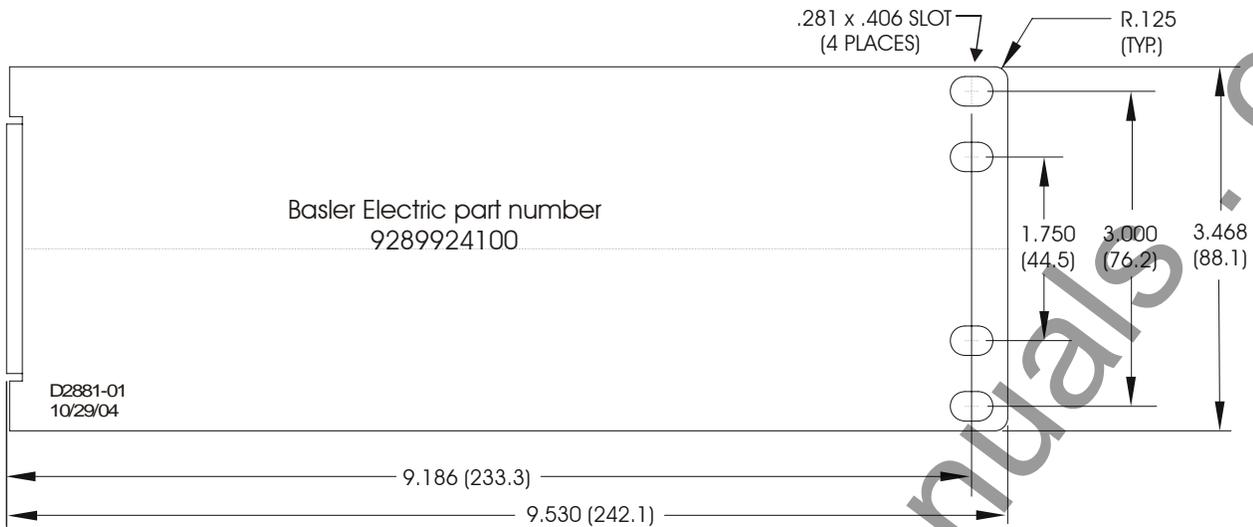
Adapter Bracket for Mounting a Single Relay in a 19-inch Rack
